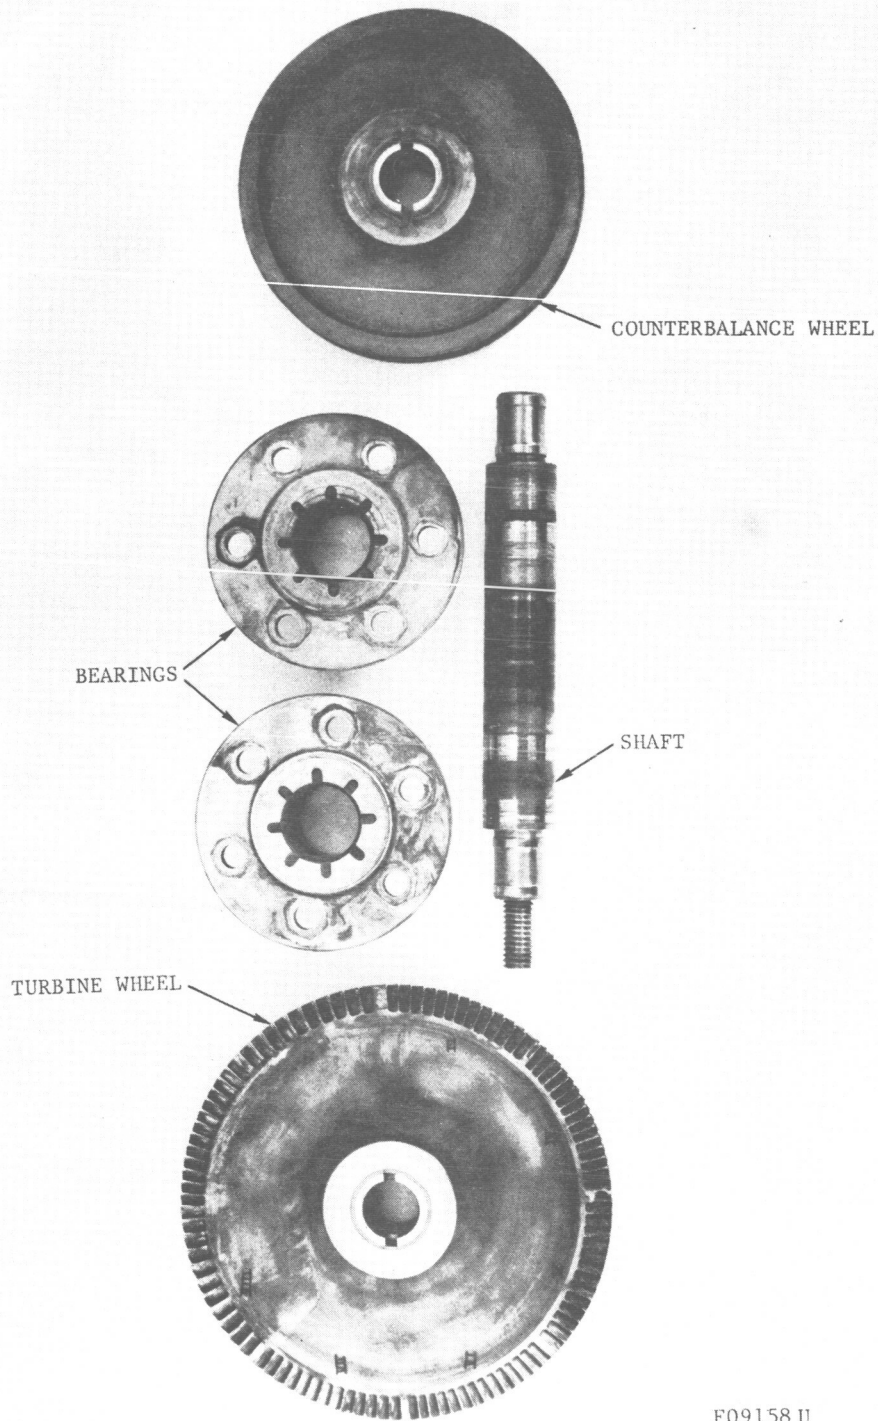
Turbine wheel, shaft, bearings, and counterweight after endurance test
